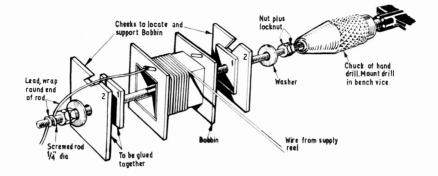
A winding jig is made up so that Parts 1 fit inside the bobbin and the Parts 2 prevent the cheeks bulging. Studding and nuts clamp the two ends onto the bobbin; both pairs of Parts 1 and 2 are glued together. Tightness is very important, without damaging the bobbin, to prevent the bobbin assembly slipping. Spigotted washers or key-ways would help
